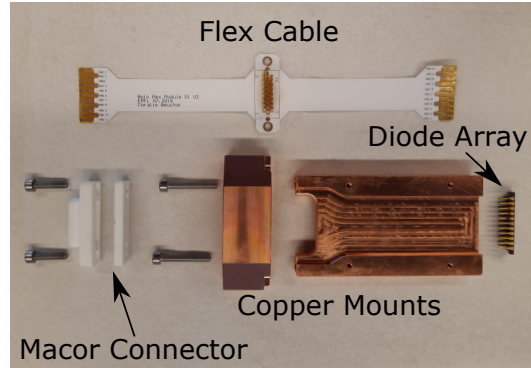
Assembly of an AXUV diode array on a copper module with a printed flex PCB.
